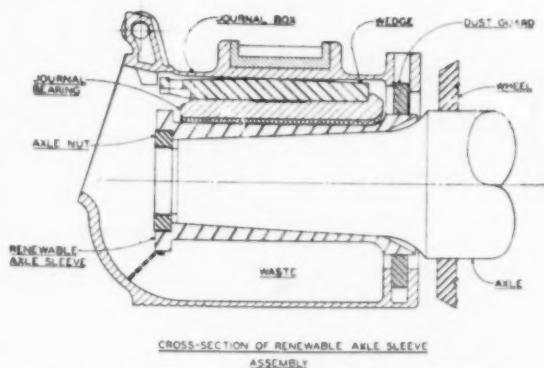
CROSS SECTION OF RENEWABLE AXLE-SLEEVE ASSEMBLY
